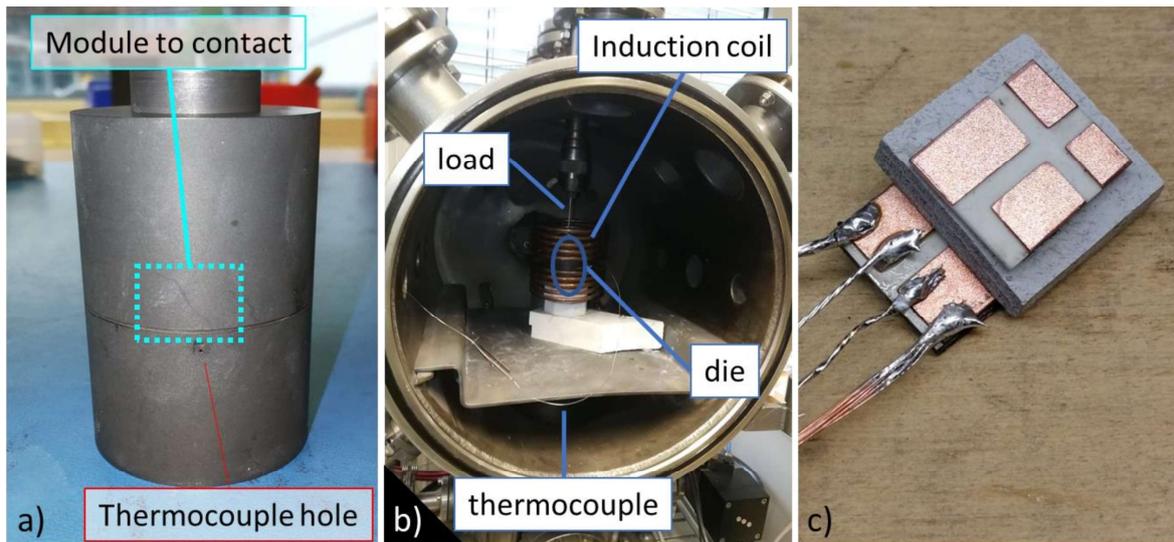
a) graphite die used for module joining, b) chamber of the induction furnace in which the module is joined, c) assembled 2-pairs TEG module with soldered cables, taken from [6].
